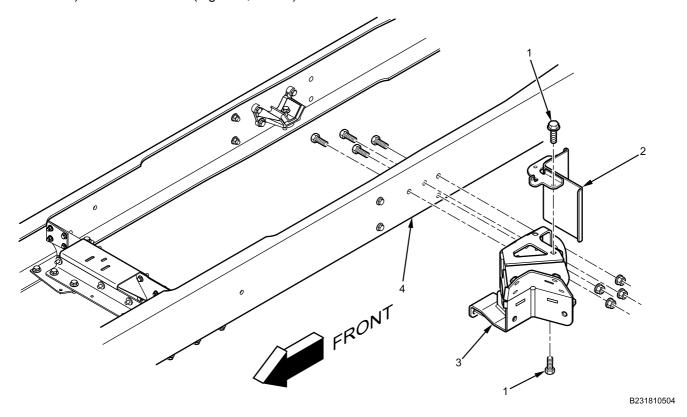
Left Inner Wheel Deflector Bracket Shield.
